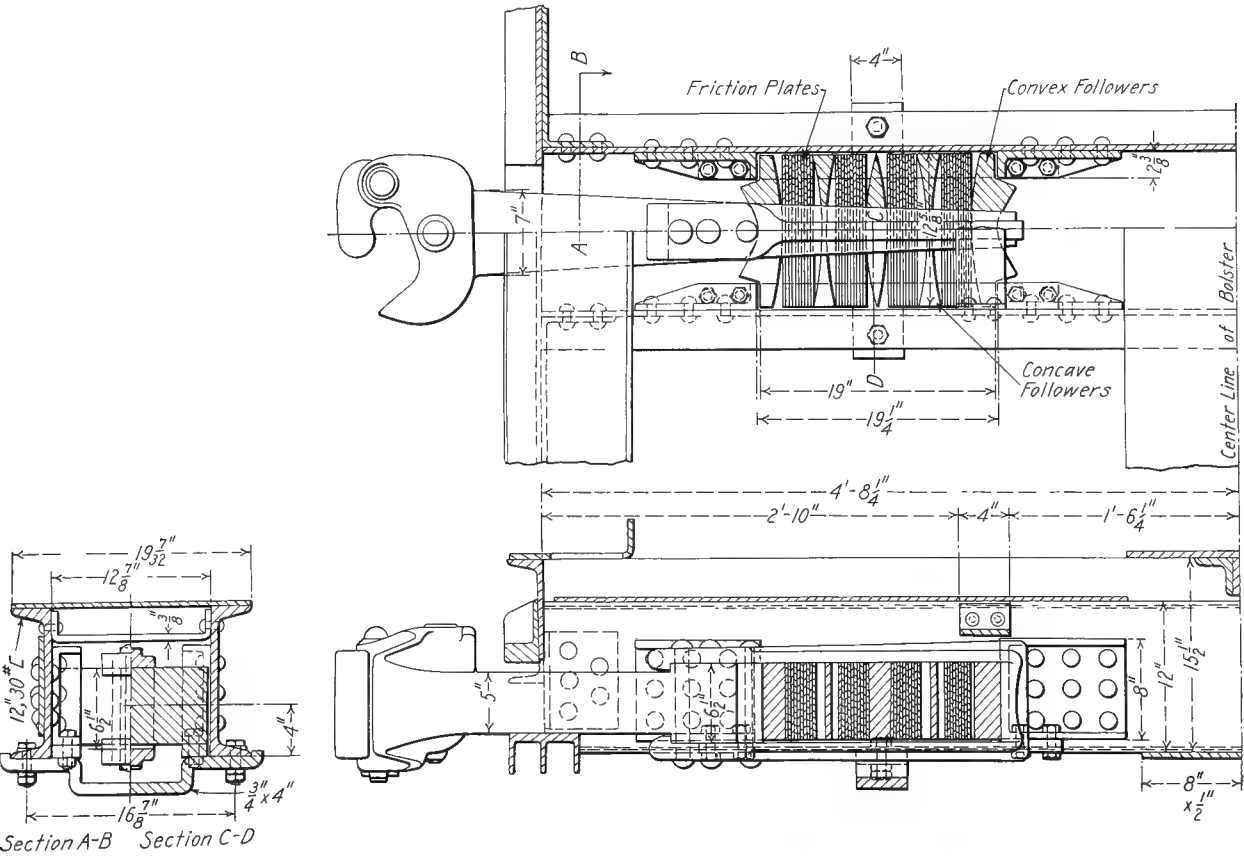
Application of Waugh-Forsyth High Capacity Radial Draft Gear to Southern Railway Freight Cars. Waugh Draft Gear Company.
